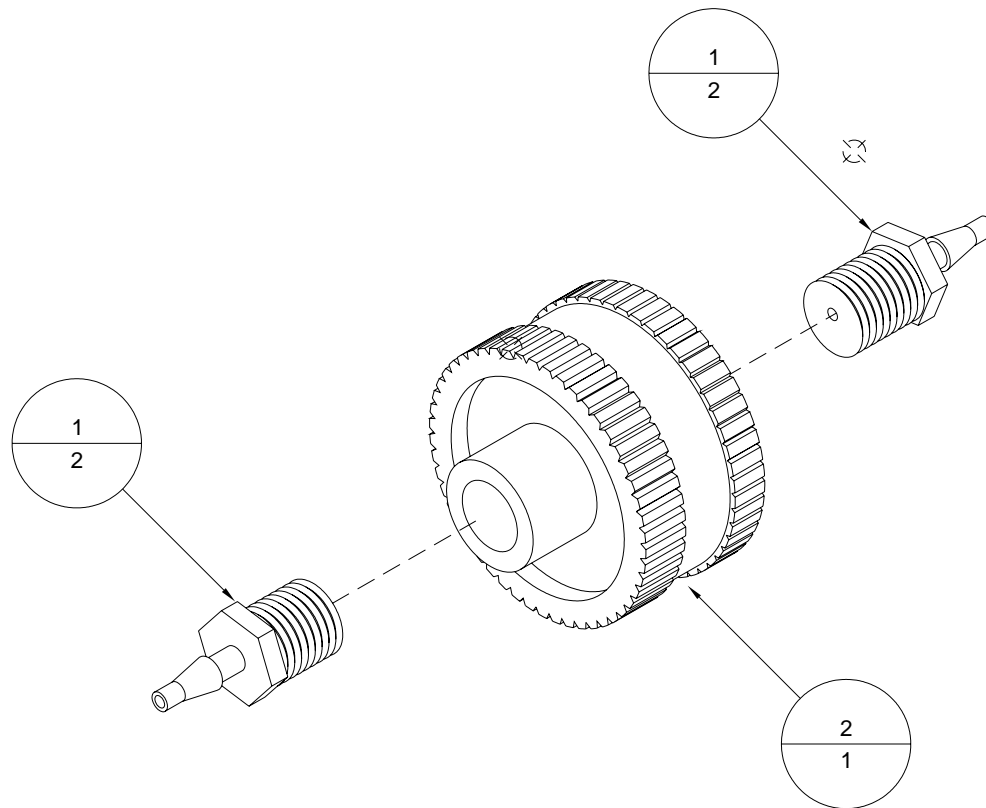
Filter Holder Assembly – IDS (9100149A)
